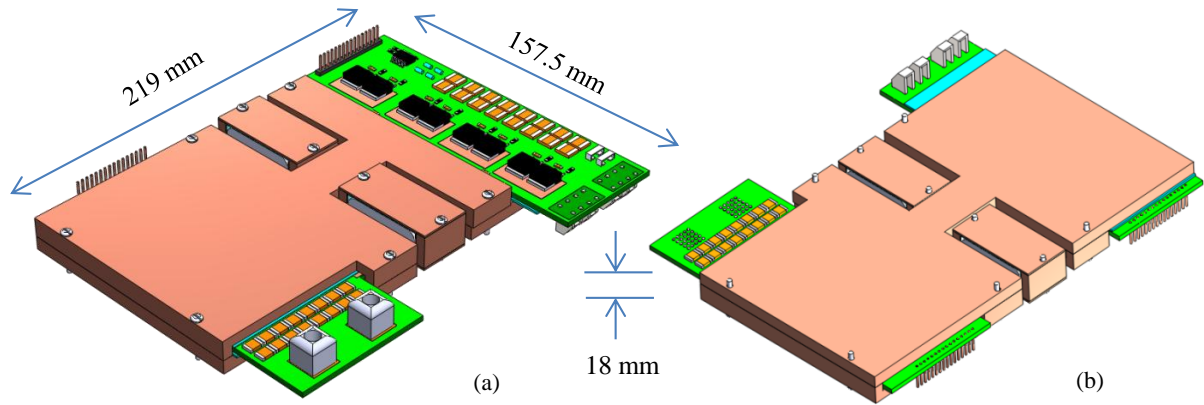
Complete DAB converter with DSCC (a) top side and (b) bottom side
